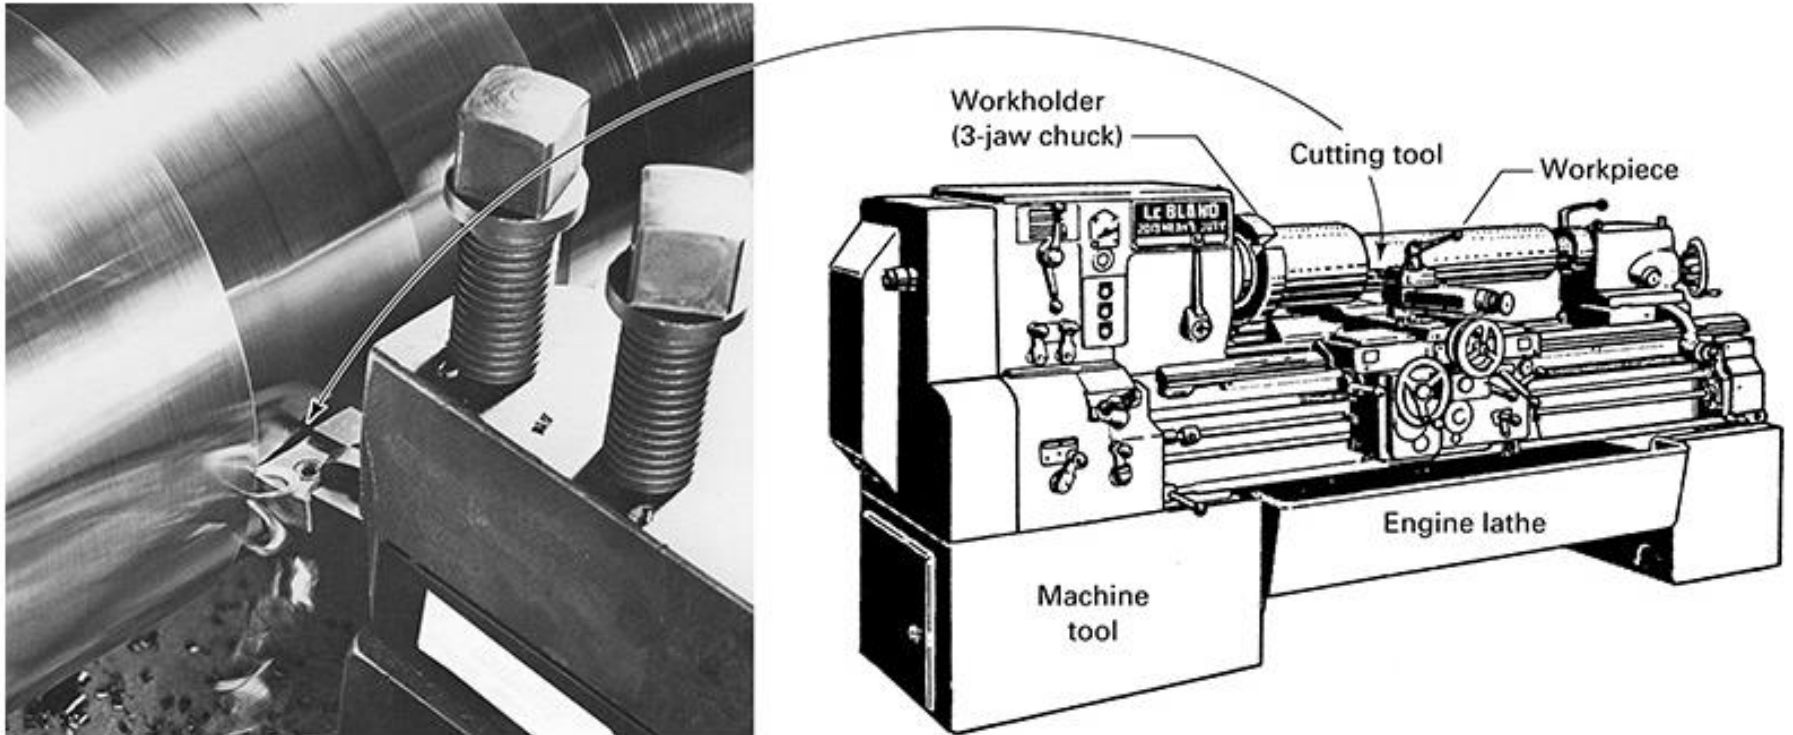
Schematic of a standard engine lathe performing a turning operation, with the cutting tool shown in inset.
